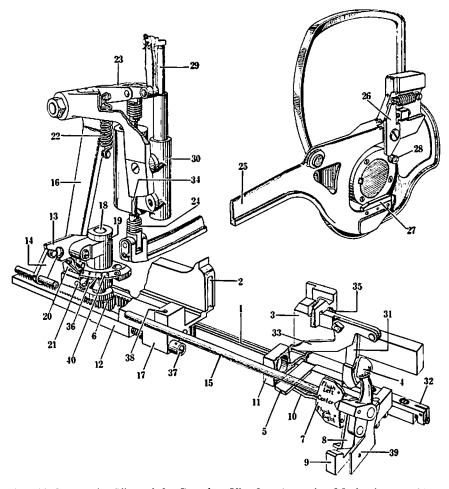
Perspective View of the Complete Vise Jaw Operating Mechanism provided in the Intertype quadding and centering device. This illustration shows the means provided for the engagement of the vise jaws with the right-hand vise jaw rack and the mechanism which imparts movement to the vise jaws through their connection with the rack.
